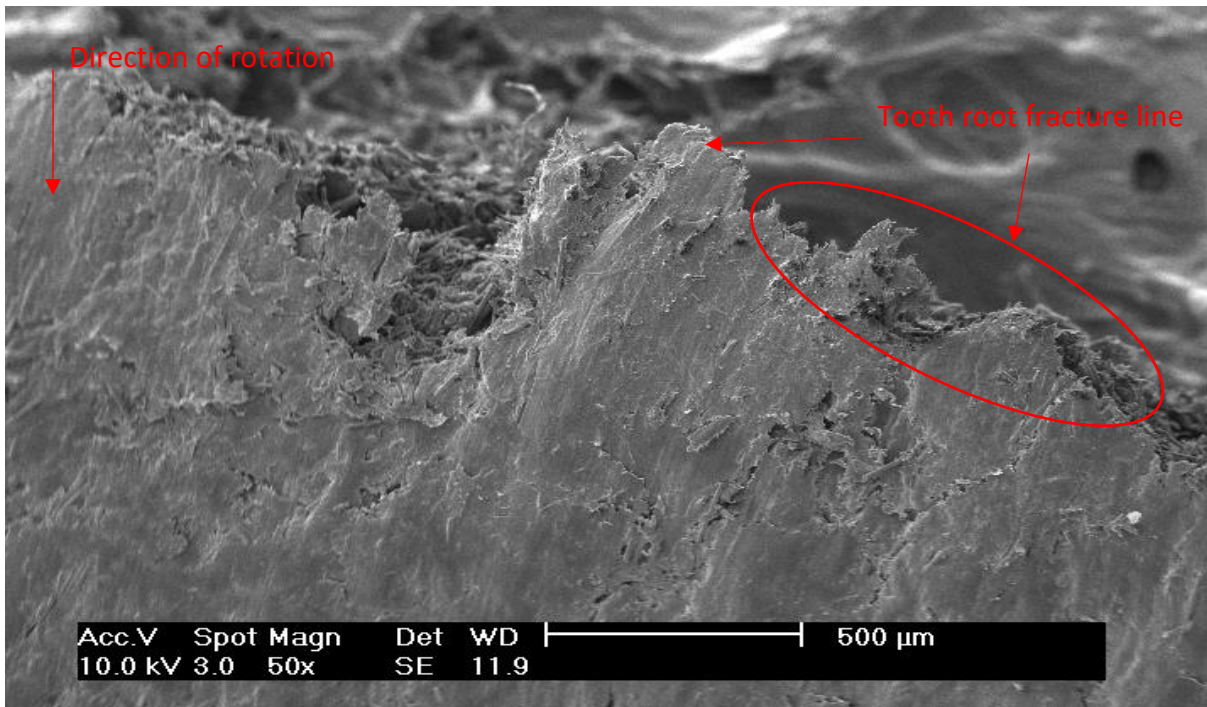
65°C produced showing tooth fracture at root for driven gear.
